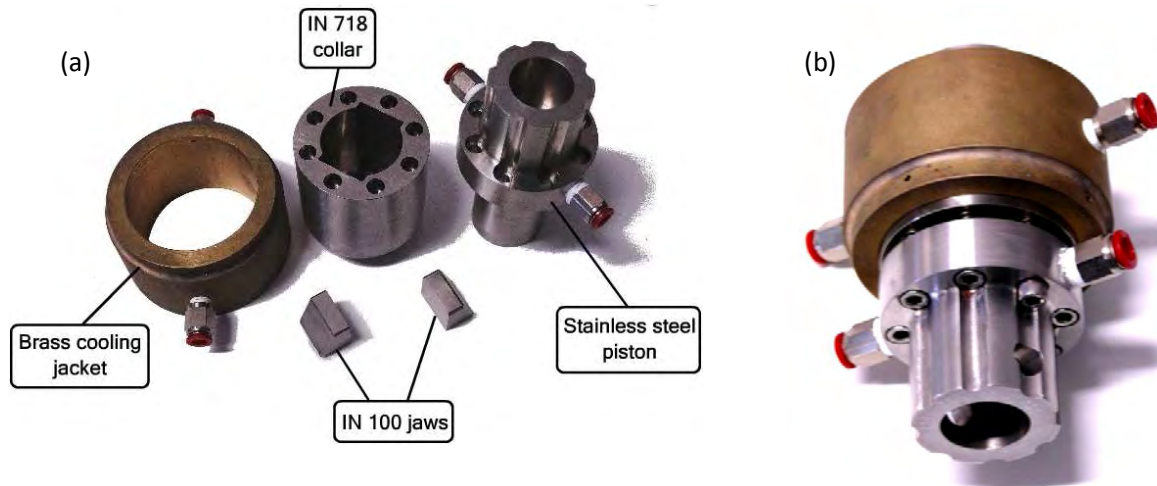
High temperature grip: (a) disassembled (b) assembled.
